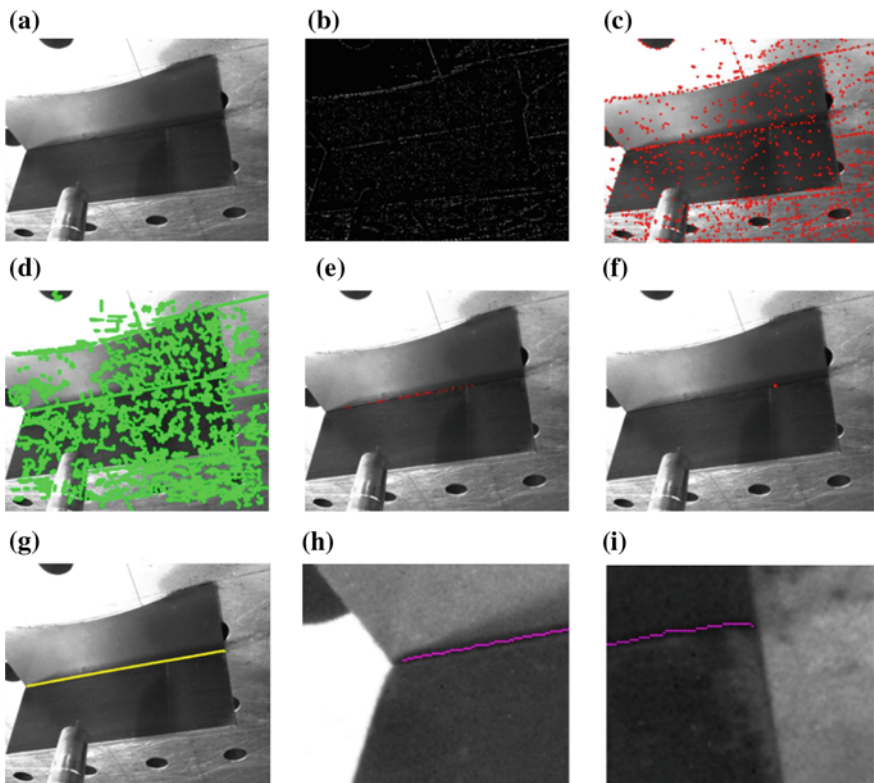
Adaptive line growing method for weld joint detection
